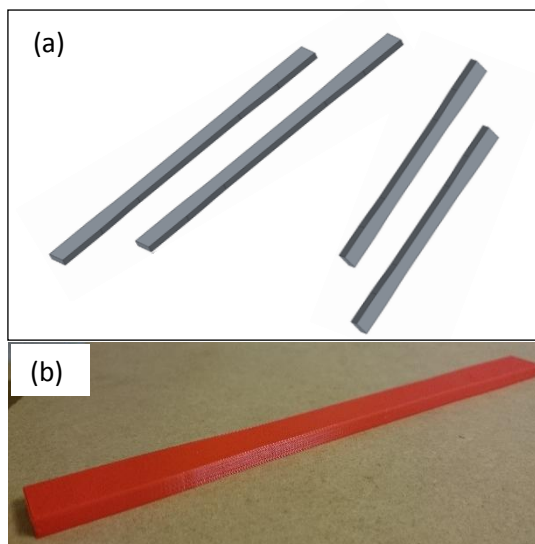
Example of (a) the designed specimens, and (b) a printed testing specimen
